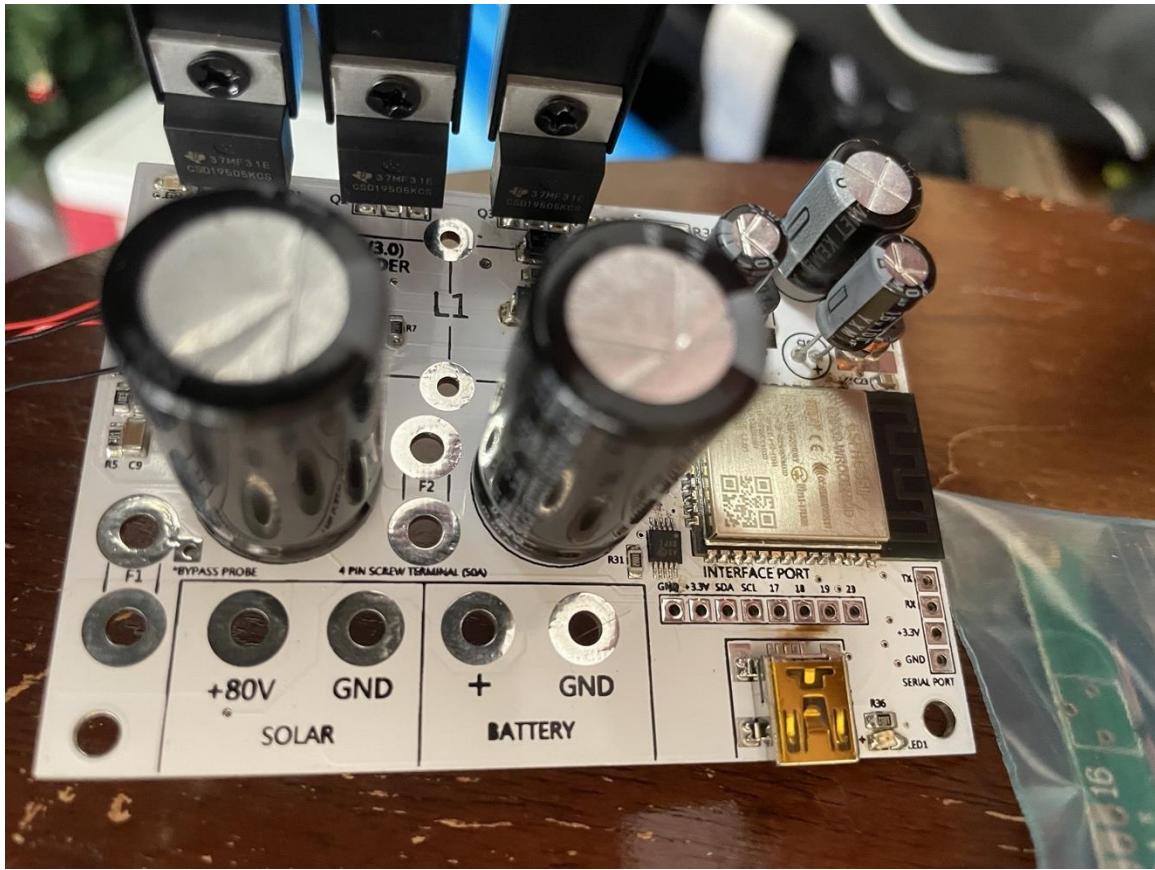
SMD components all soldered with partial soldering of through-hole components completed.
